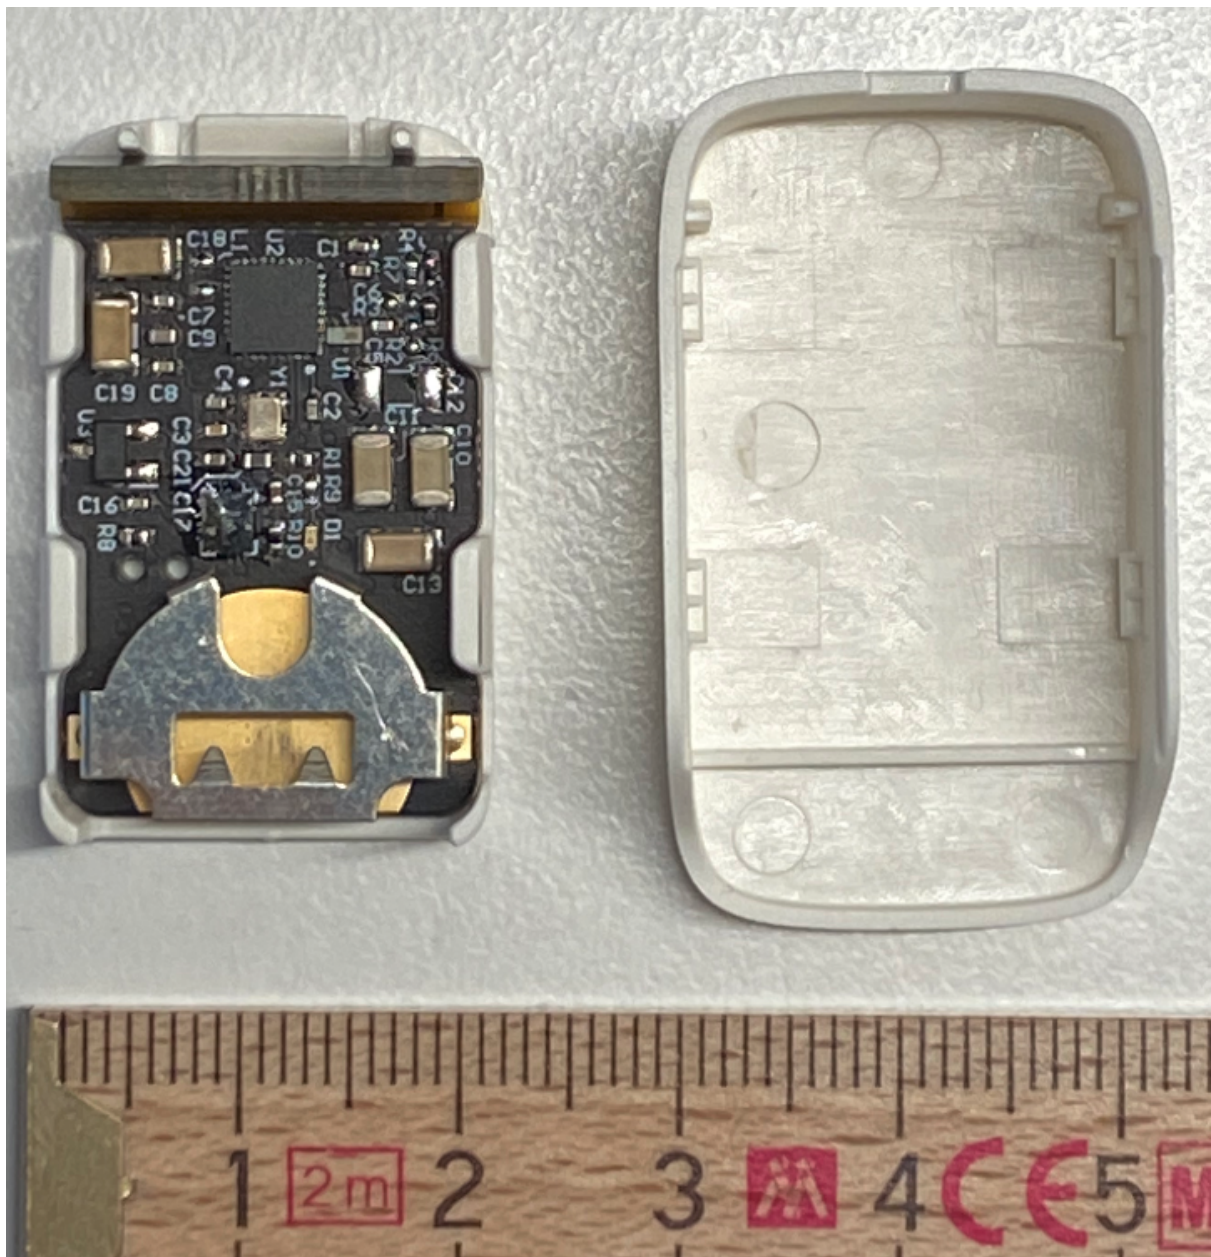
The assembled PCB placed inside the plastic enclosure. There are guides for the antenna to keep it in place inside the enclosure. The lid (right) can be turned and snapped on top of the assembly to the left.
